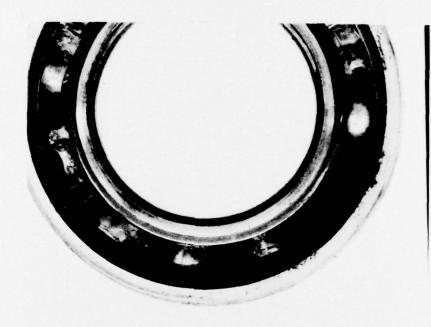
Bearing S/N TRL-22. 2x Enlarged View.
